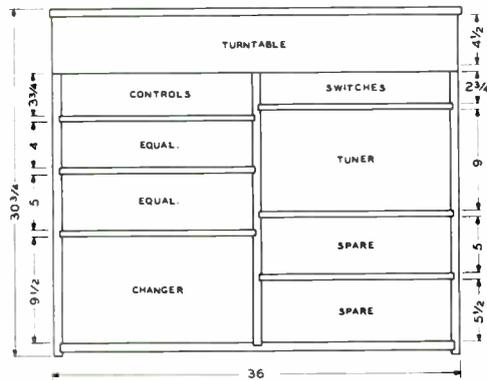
Dimensions of the equipment drawers. Cabinet is $18\frac{1}{2}$ ins. deep
